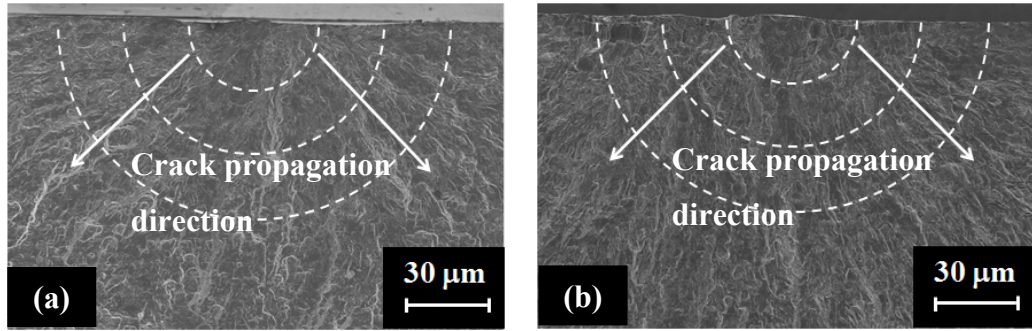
Scanning electron microscopy (SEM) images of the fracture surface: (a) untreated specimen, (b) 150-A/mm² specimen.
